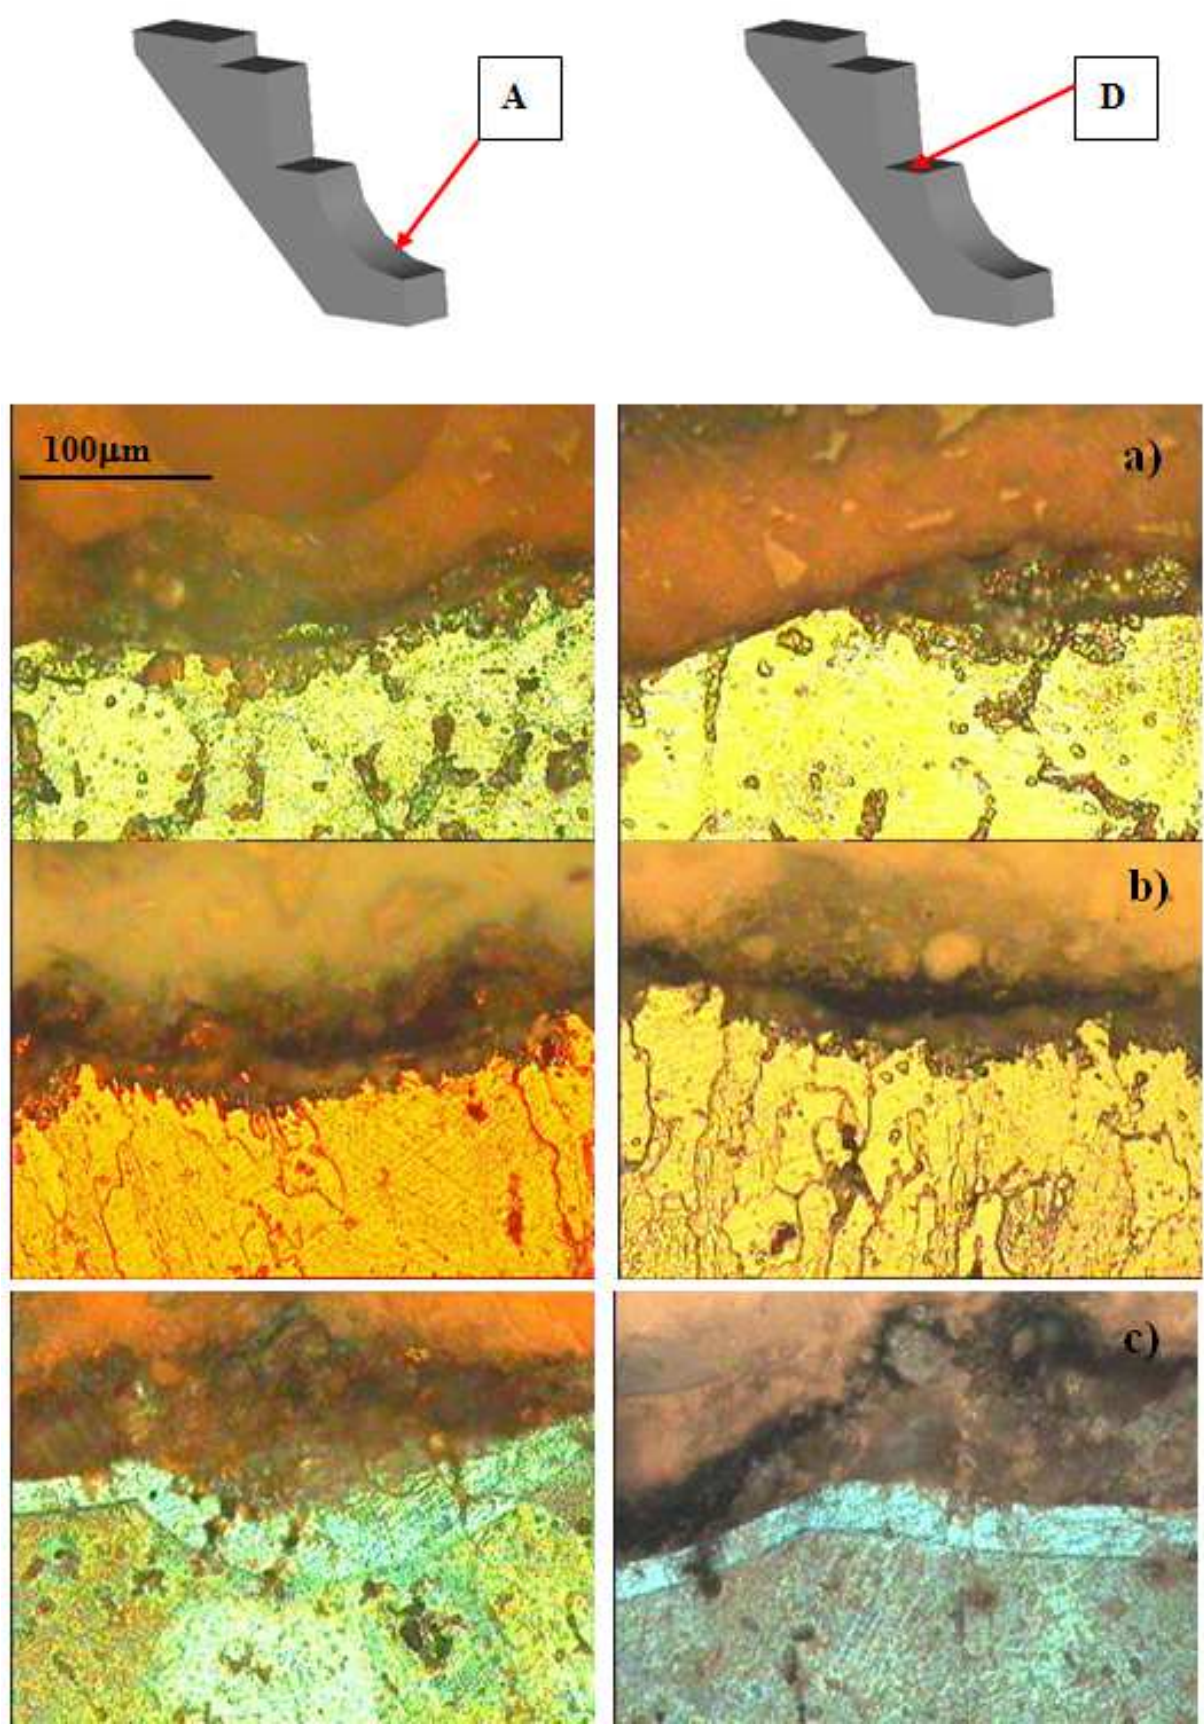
Etched sections of roughed workpieces: a) Al 7075, b) Al 7050, c)Al 2219
